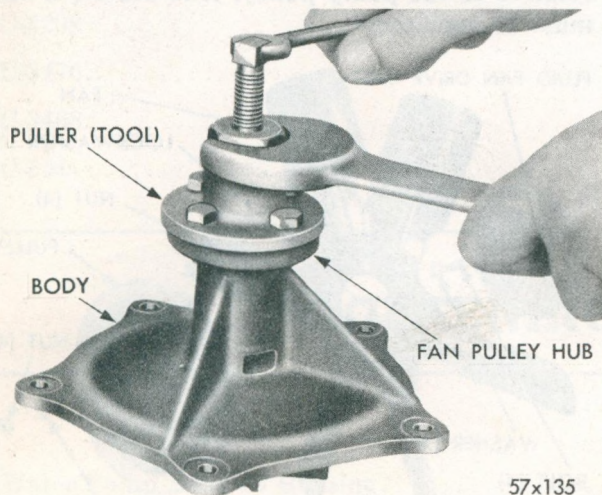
Removing Fan Hub with Puller using Tool C-3208
